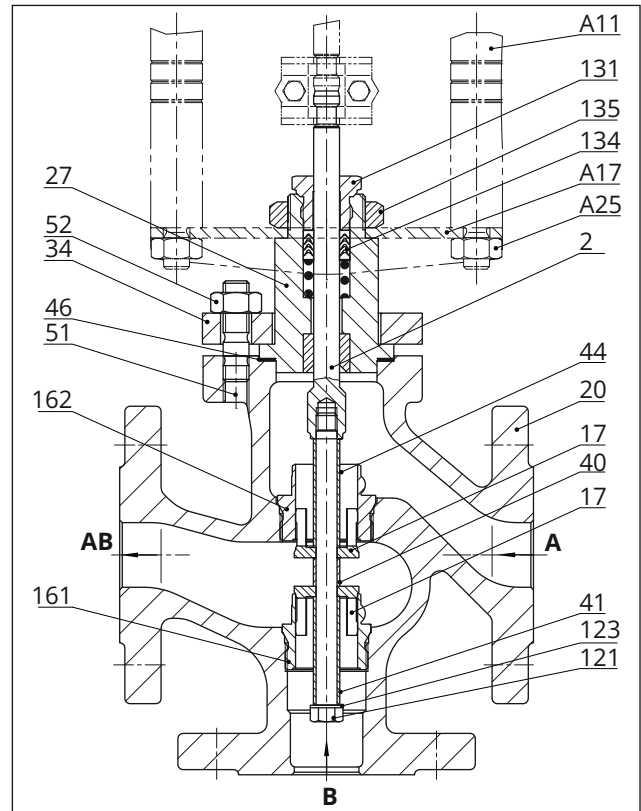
Type 3323 Valve (mixing valve), DN 15 to 50/NPS ½ to 2 · Mounting using a central nut (form B attachment)
